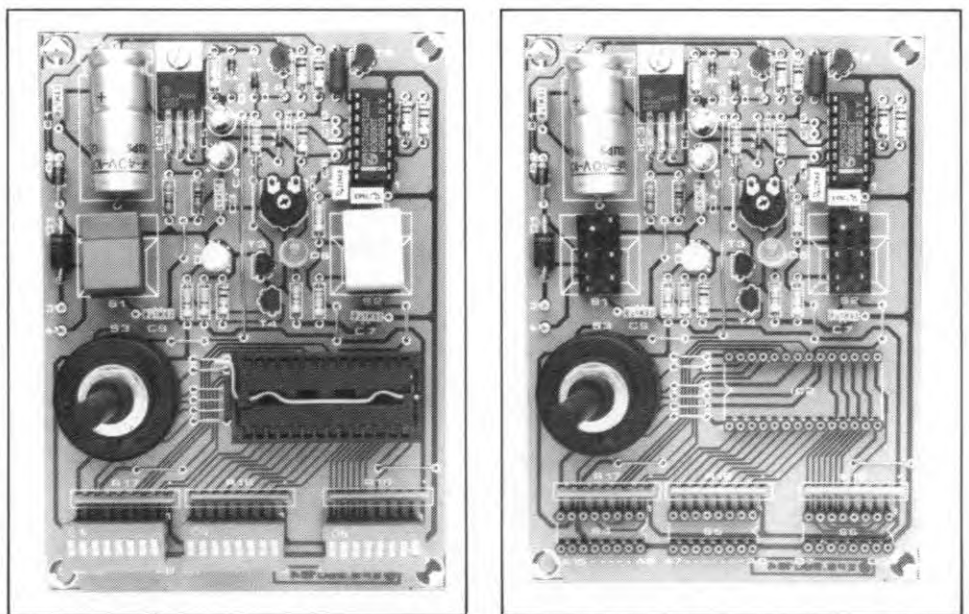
As shown on these photographs of the assembled PCB, IC sockets are perfect for mounting the push-buttons and the DIP switch blocks. SIL strips are used for the ZIF socket. The height of the prototype enclosure did not require low-profile IC sockets to be stacked.
